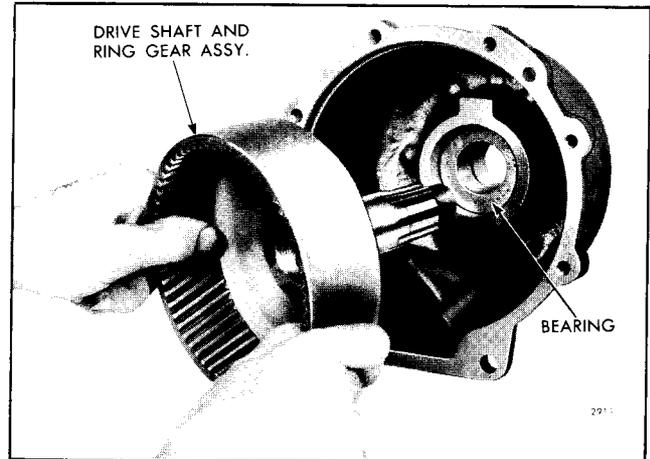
Installing Reduction Gear Drive Shaft and Ring Gear Assembly in Gear Housing (2.1:1 Ratio)
